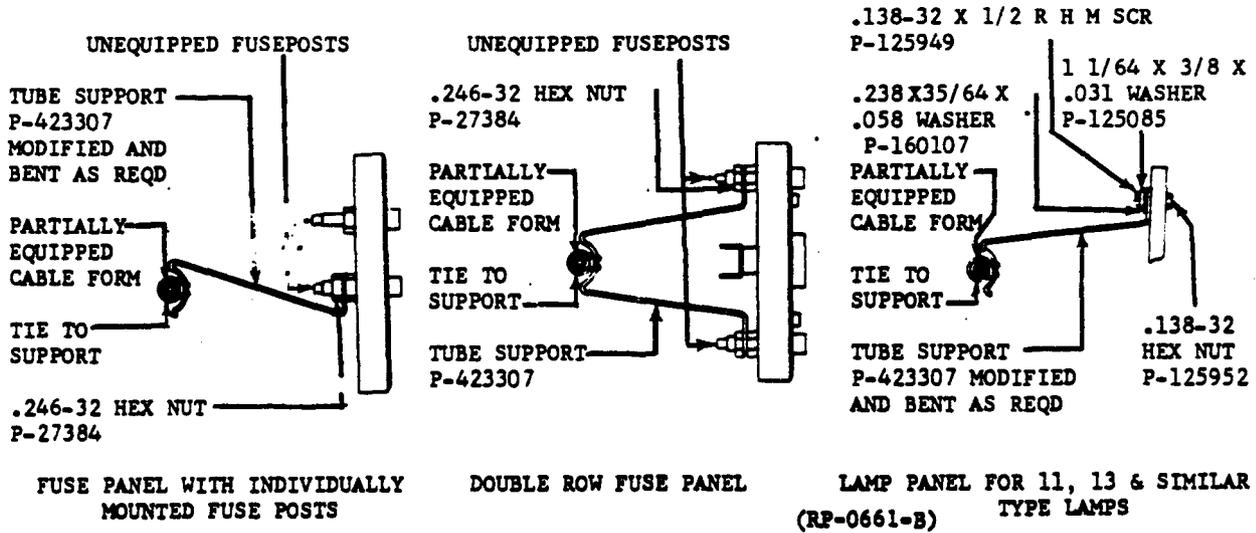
SUPPORTING CABLE FORM AT PARTIALLY EQUIPPED FUSE AND LAMP PANELS (PAR. 3.82)
